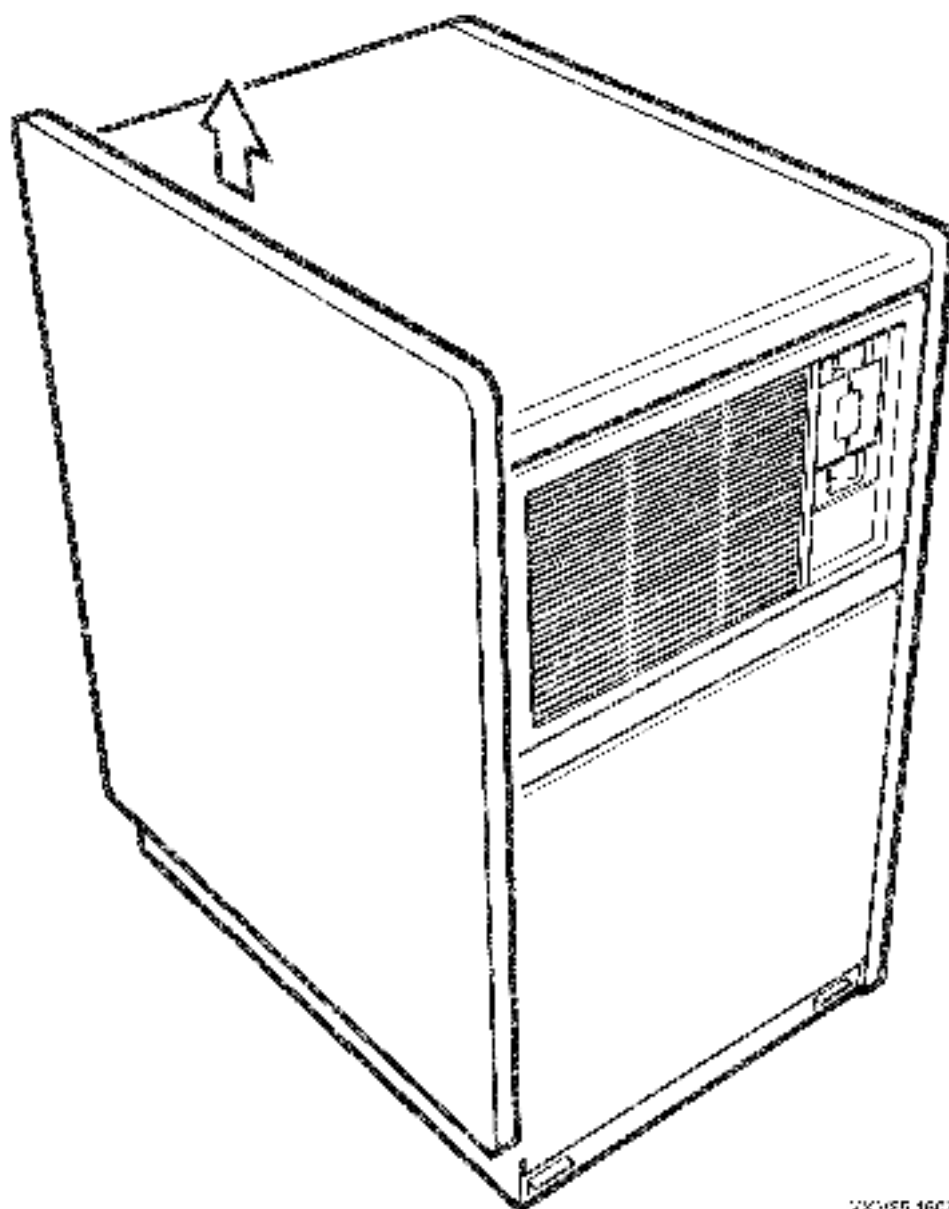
Accessing the BA32 CPU Mounting Box Hardware Components (Sheet 2 of 2)
